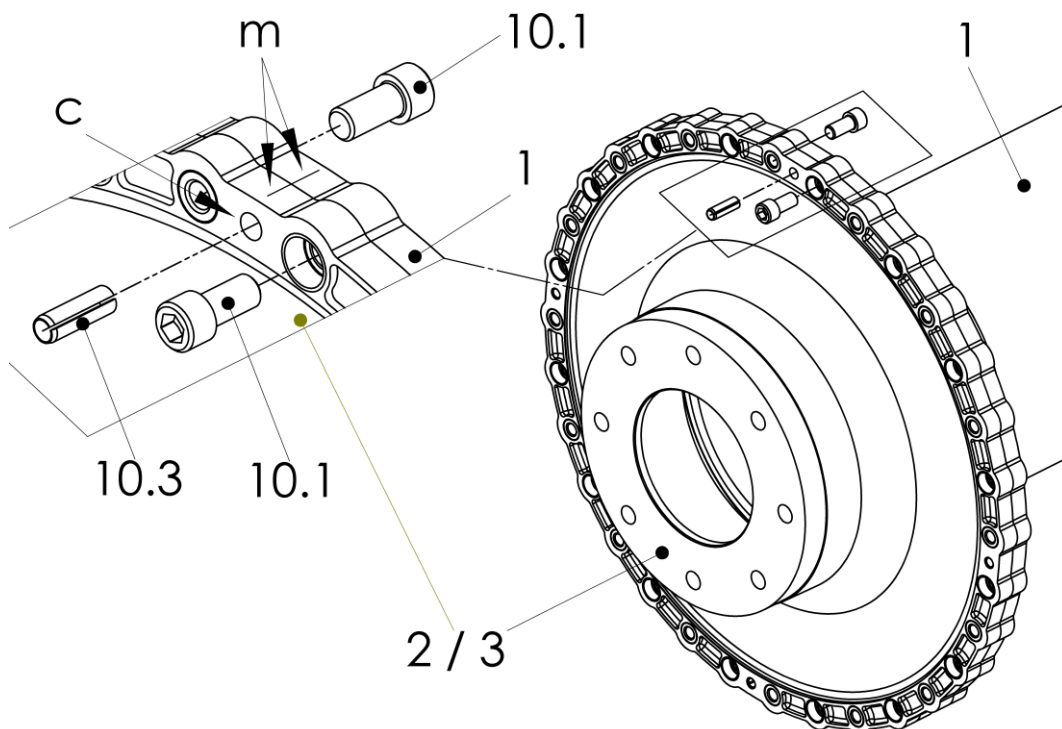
Disassembling the pre-mounted supplied coupling sizes 0, 1, 3 and 5
